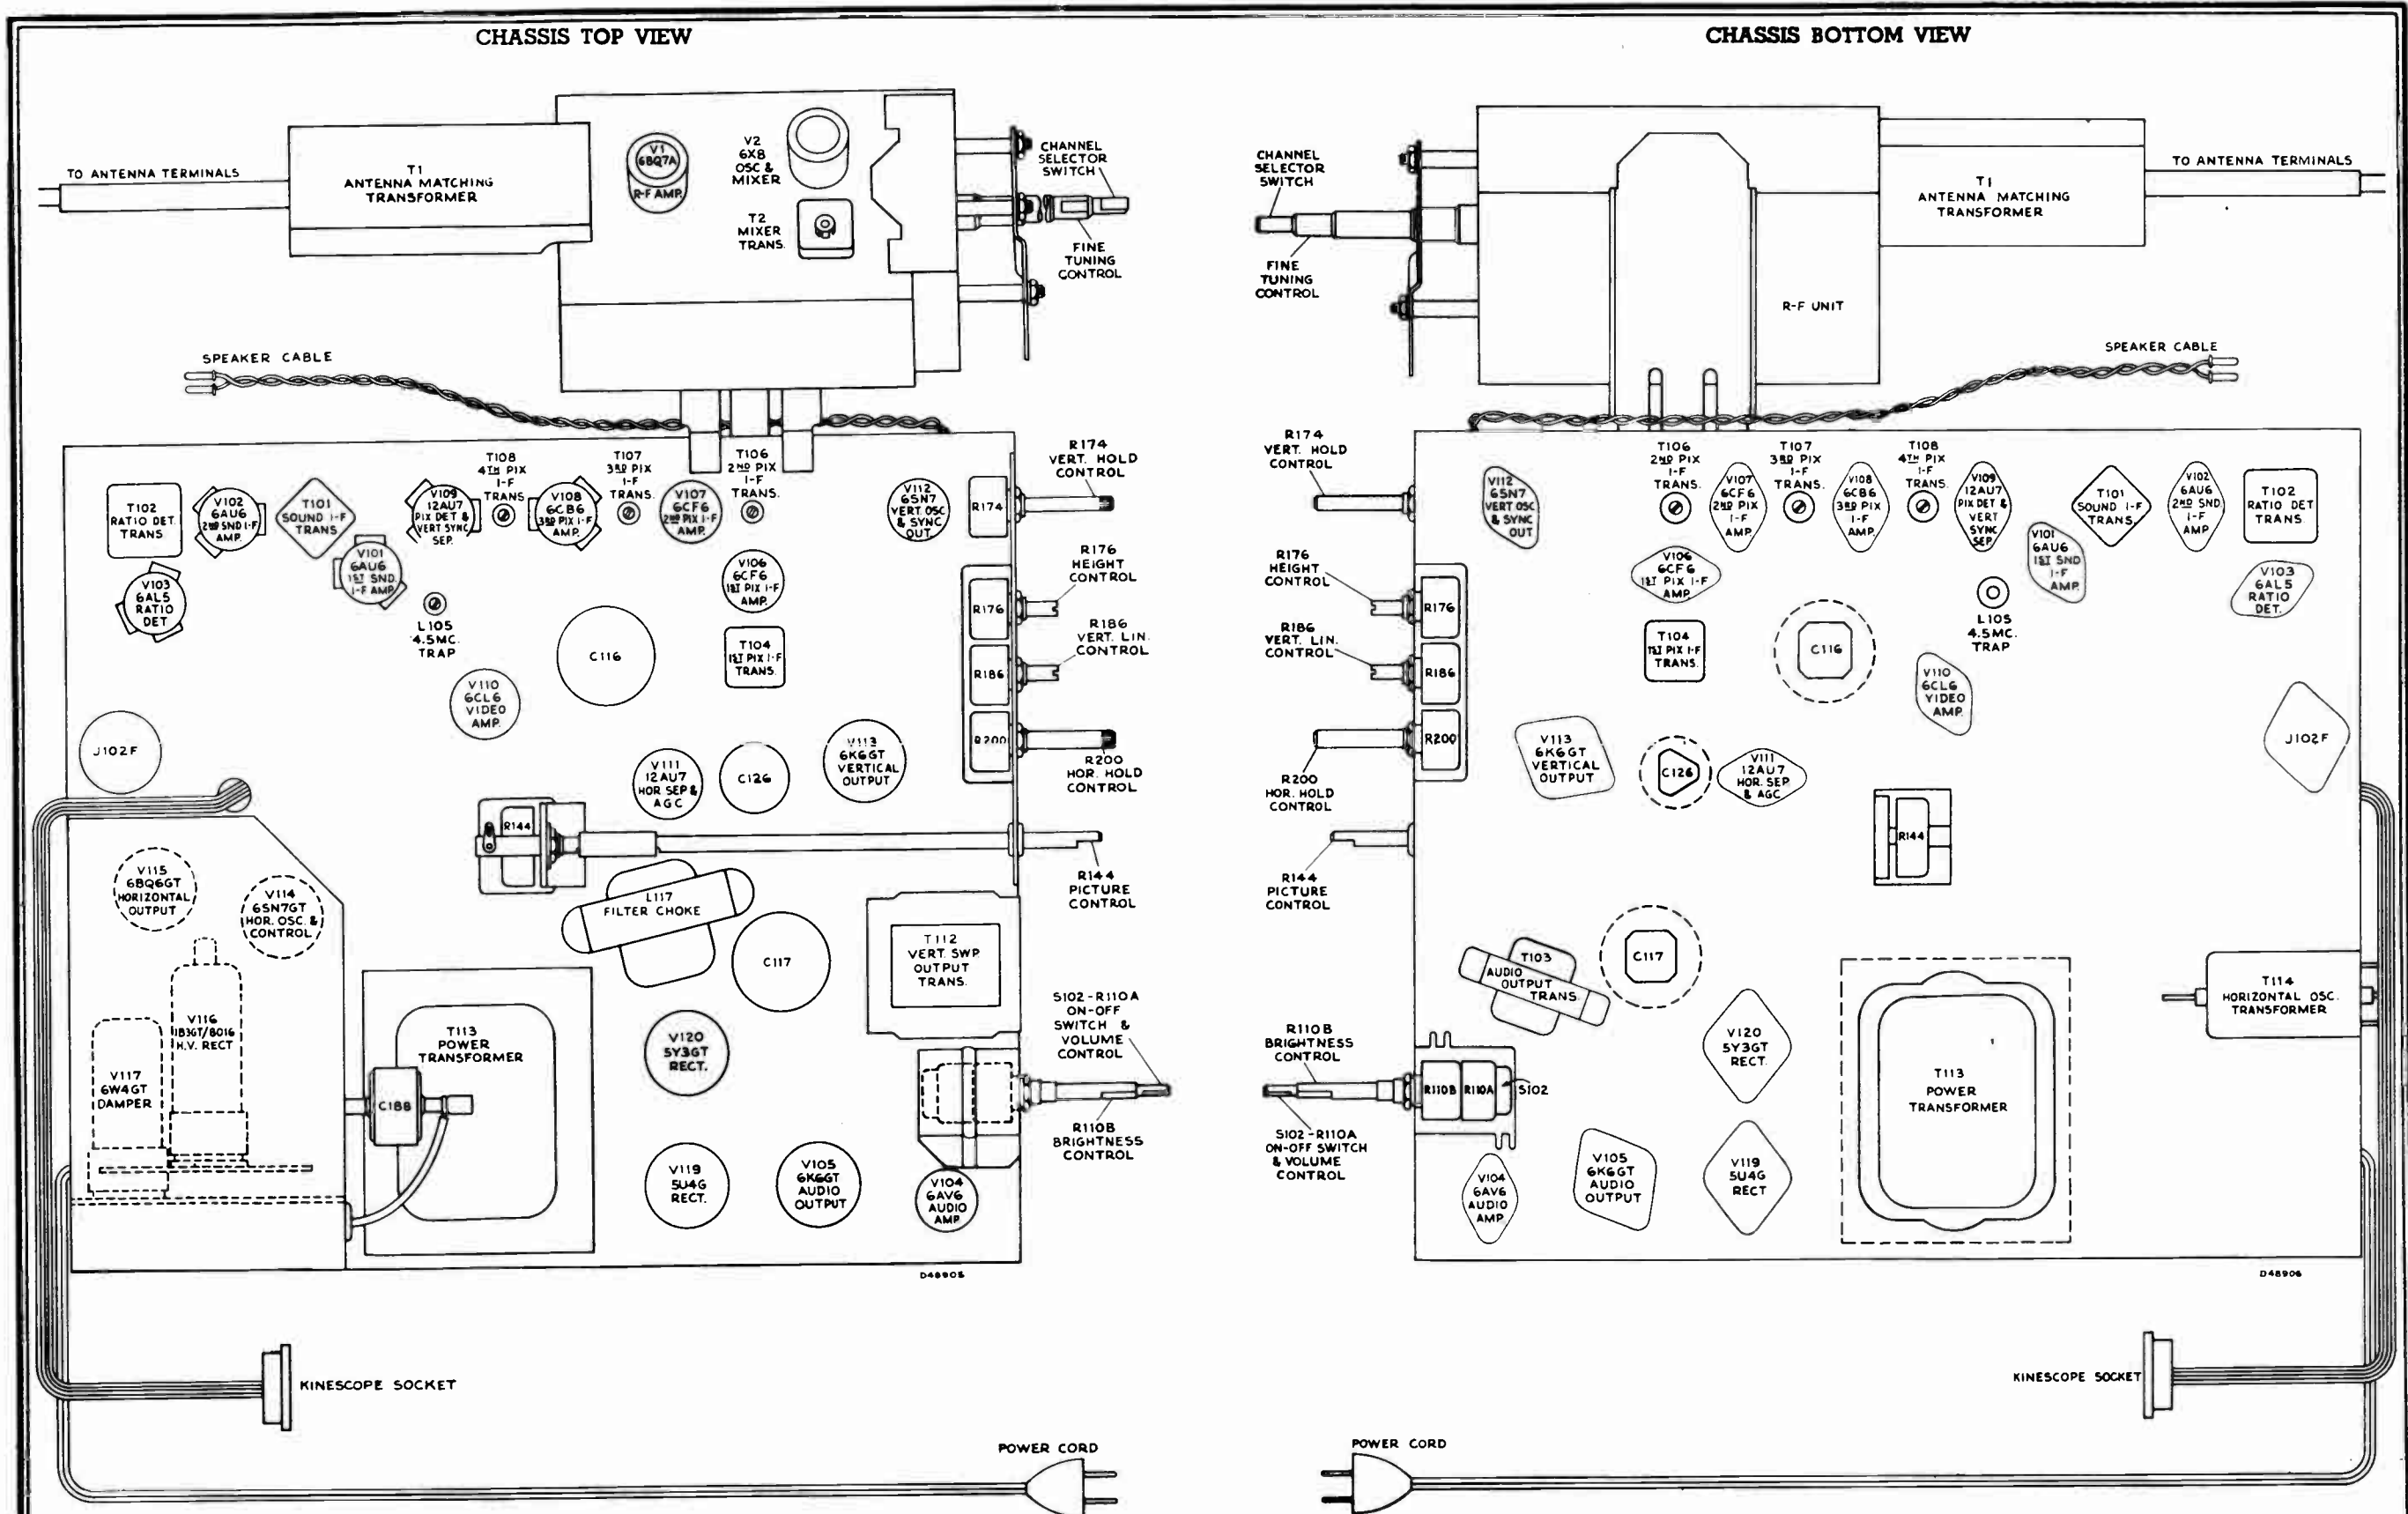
Chassis Top View (shown with KRK29 Tuner)
